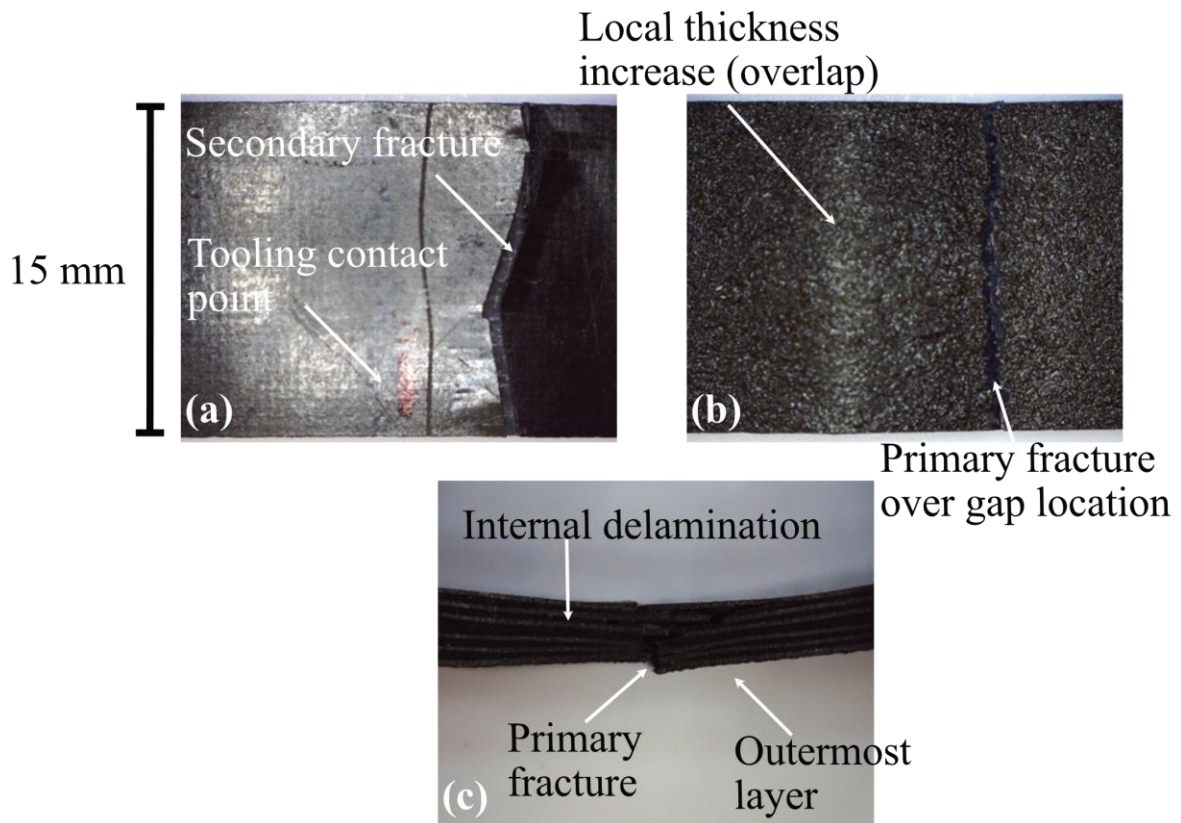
Defective samples with Mode 2 failure: tensile failure in outermost layer.
